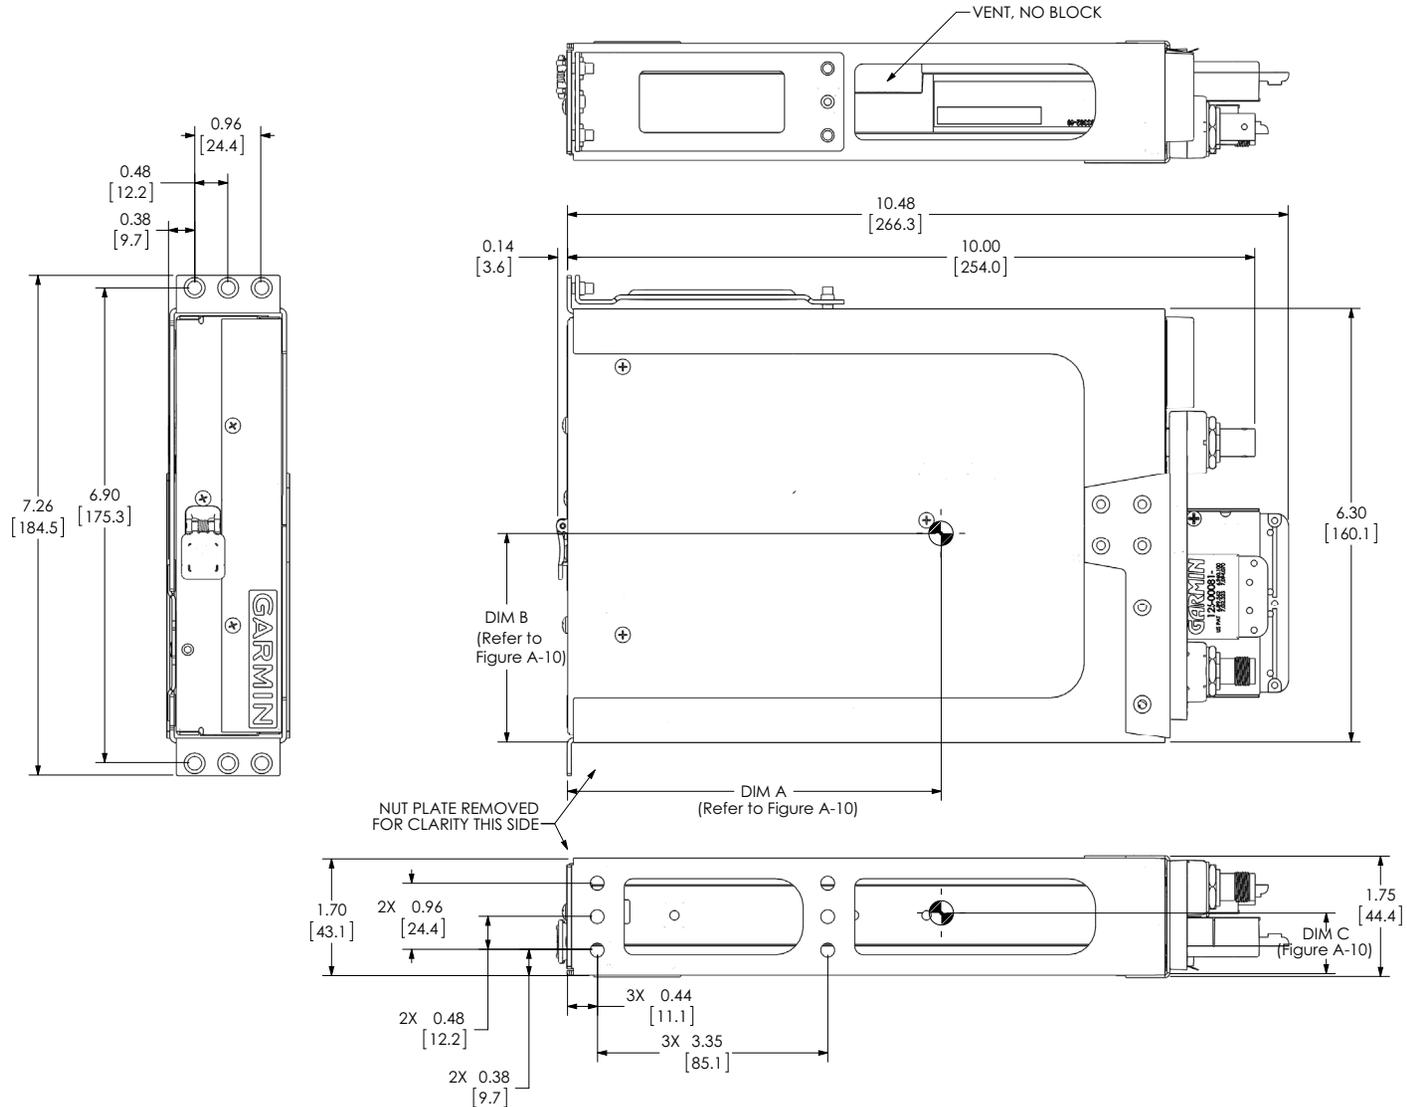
Typical GTX 3X5 G1000 Remote Mount Dimensions and Center of Gravity
